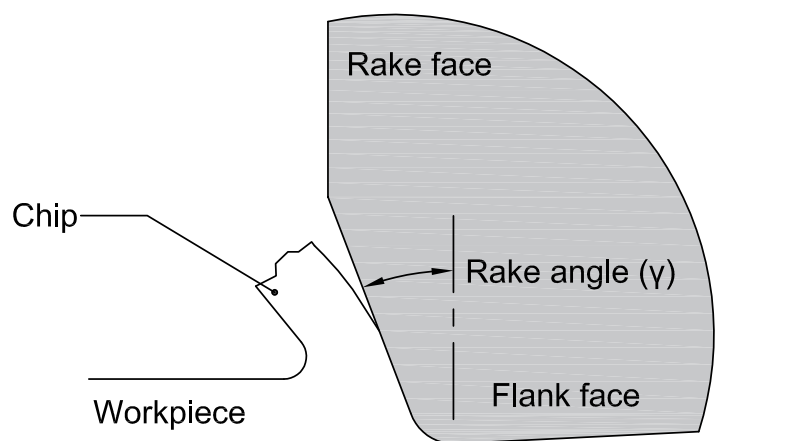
Geometry of the cutting tool [ZHOU03]
